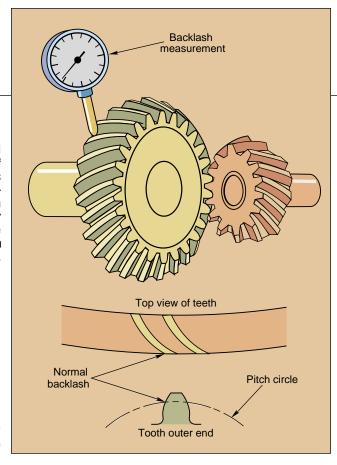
Normal backlash in a set of spiral bevel gears is measured perpendicular to the tooth surface at the outer end (heel) of the tooth, using a dial gage.
